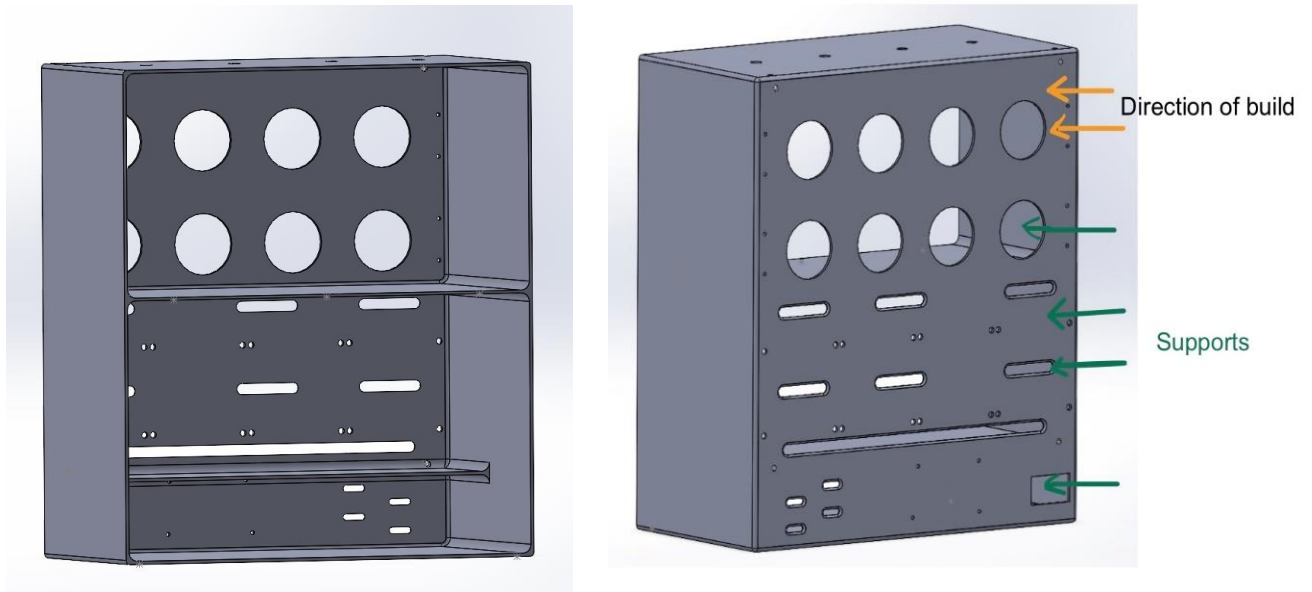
Isometric view of the part highlighting the direction of build and highlighting the location where supports are needed.
